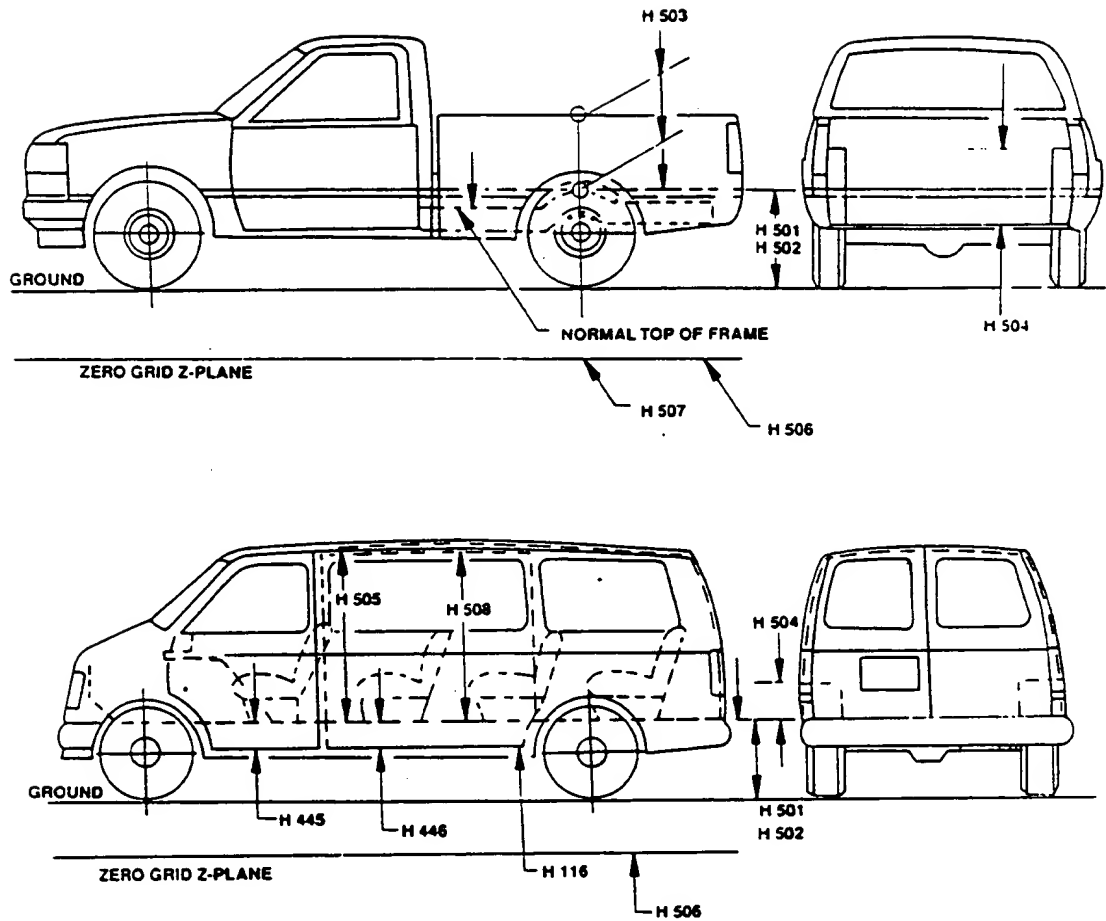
TRUCK-CARGO SPACE DIMENSIONS, HEIGHT
